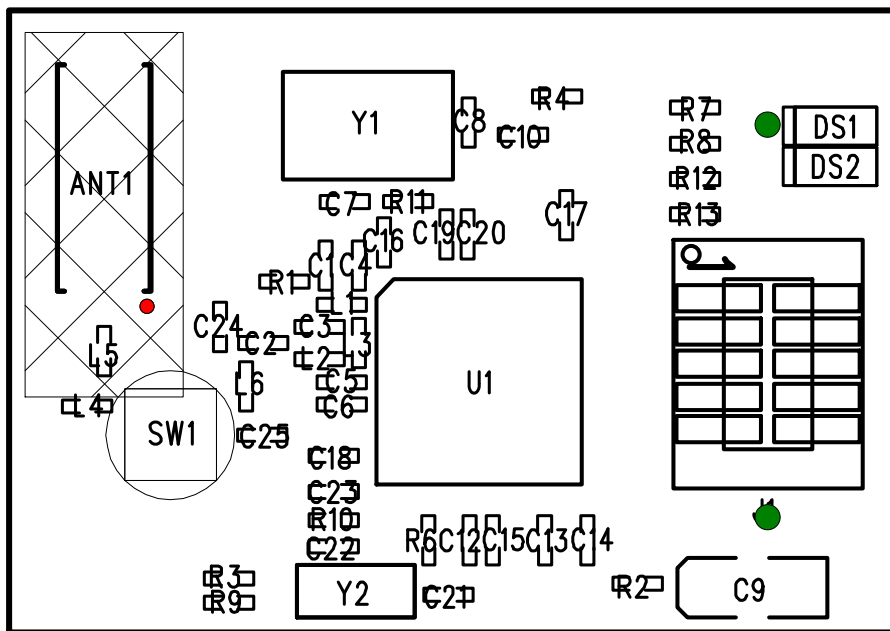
Top layer assembly print of the EM250 designs (Layer 1)
